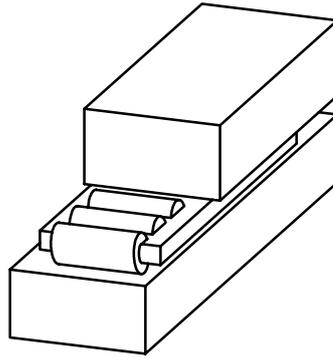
Non-recirculating linear roller bearing, linear guideway, flat type
